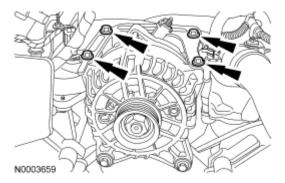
Generator Mounting Bracket Bolts Courtesy of FORD MOTOR CO.
